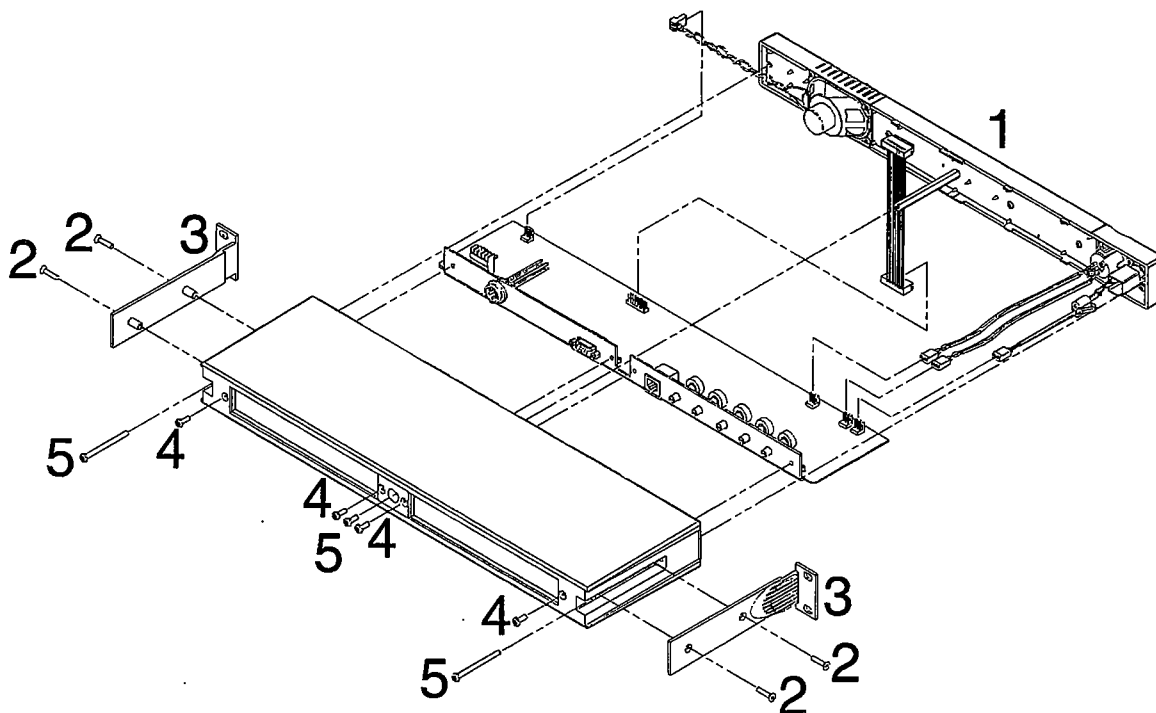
Station/Expansion Panel Assembly and Disassembly for Service
